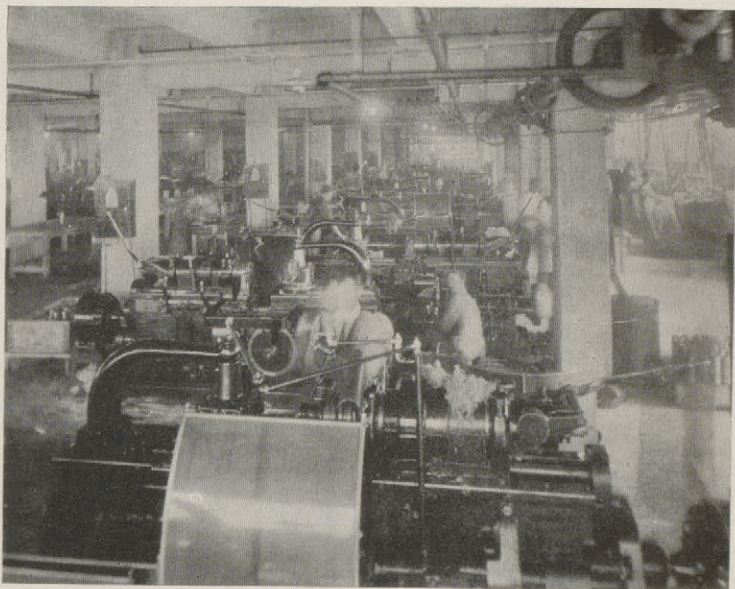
Machining Shrapnel Shells at Dominion Bridge Co., Lachine.
